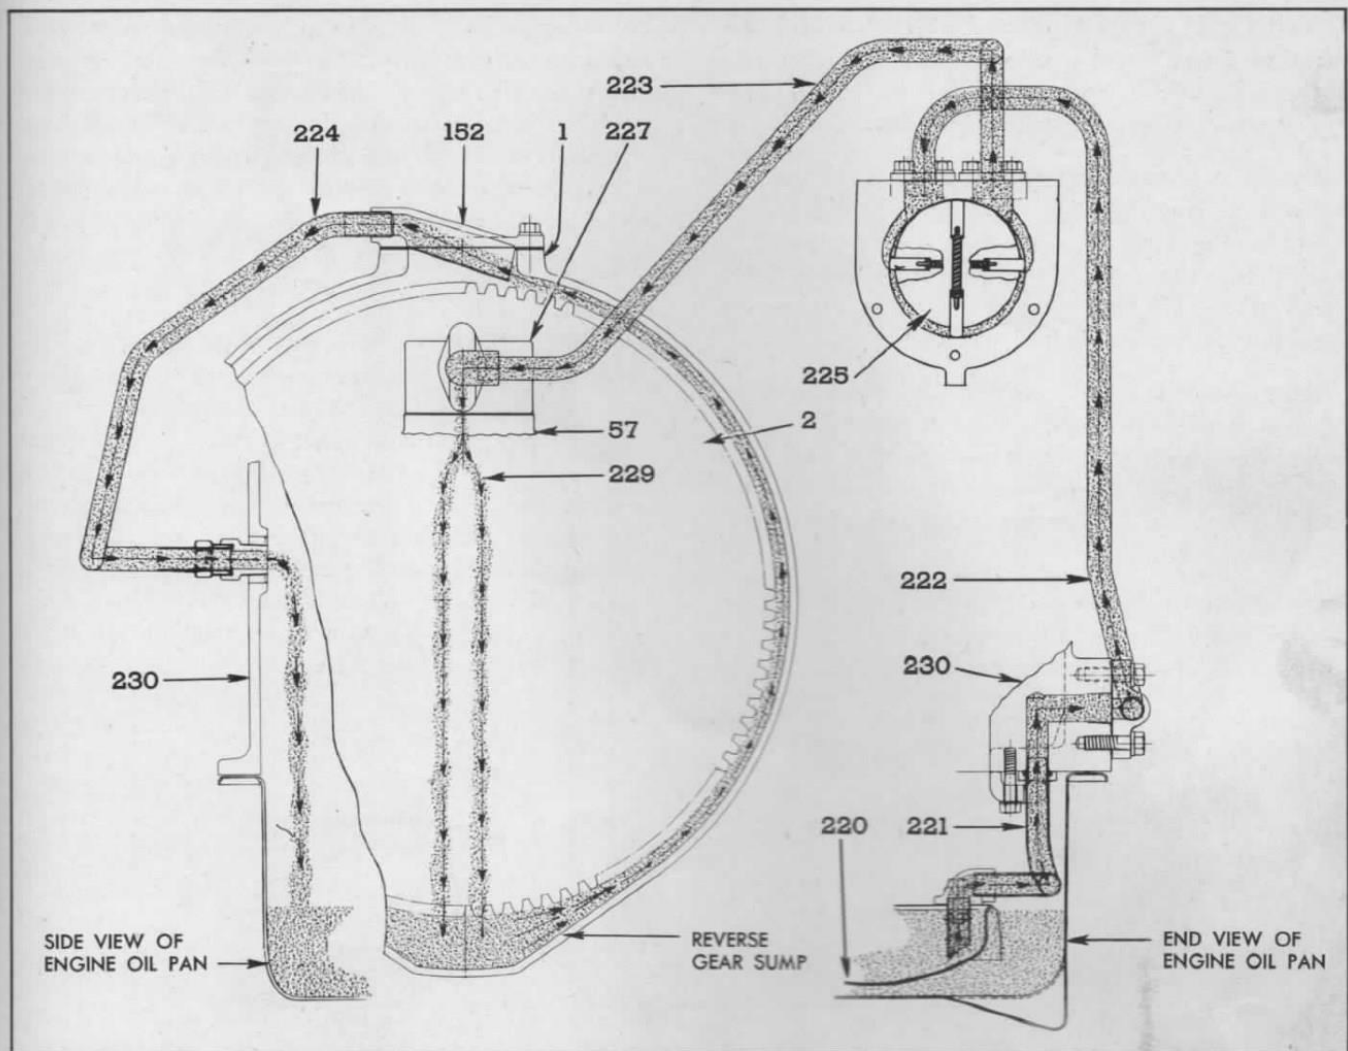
Oil Flow Diagram from Engine Oil Pan Through Pump and Control Valve, Scavenge of Reverse Gear and Return to Engine Oil Pan for Single Engine With Direct Drive Hydraulic Reverse Gear
